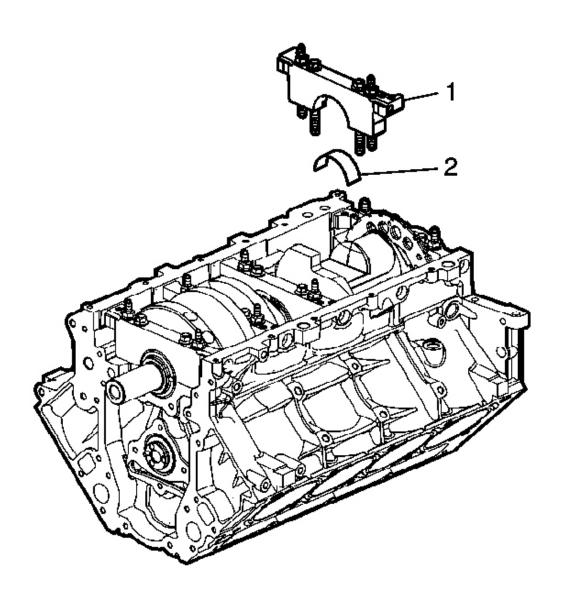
View Of Bearing Cap, Bolt & Bearing Half
